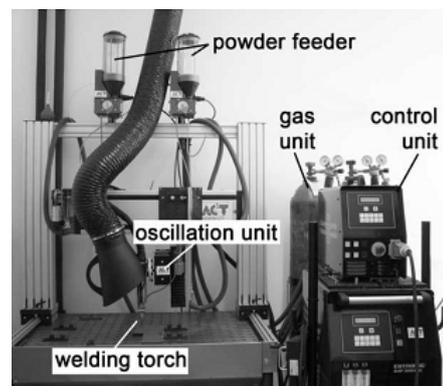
PTA welding plant at AC²T (European Centre of Tribology)
